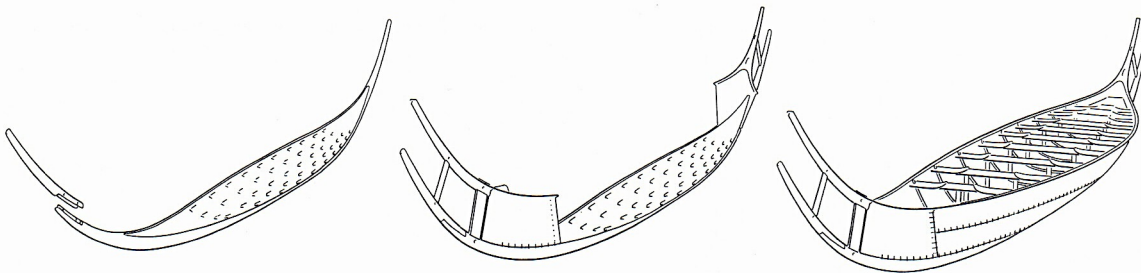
Schematic Drawing of the Manufacture of the Hjortspring Boat (Kaul, 1988).
